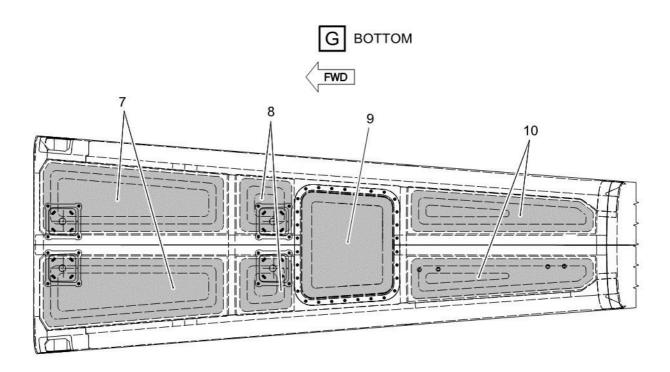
Tail section - Bonded skin panels - Detailed inspection (Sheet 5 of 6)
